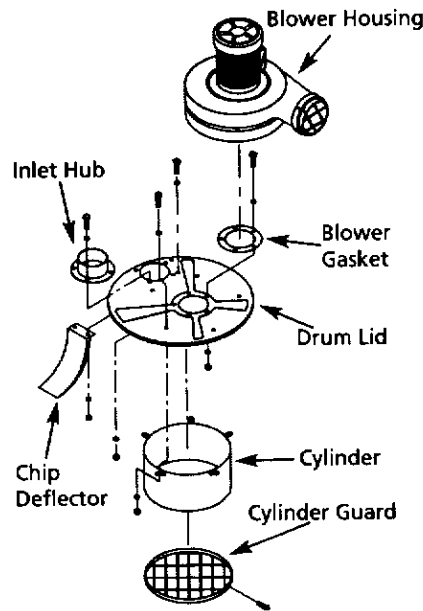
Mounting Drum Lid, Cylinder, Guard, Deflector and Inlet Hub
